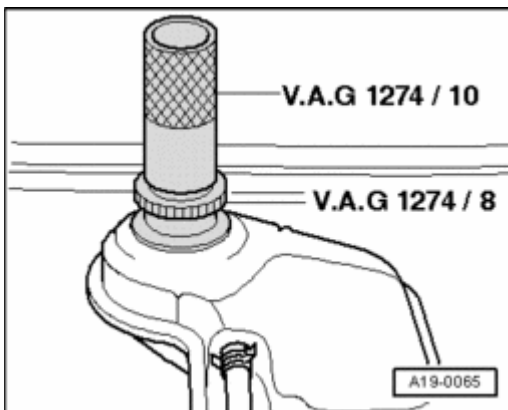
Connecting Adapter For Cooling System Tester V.A.G 1274/10 To Adapter V.A.G 1274/8
